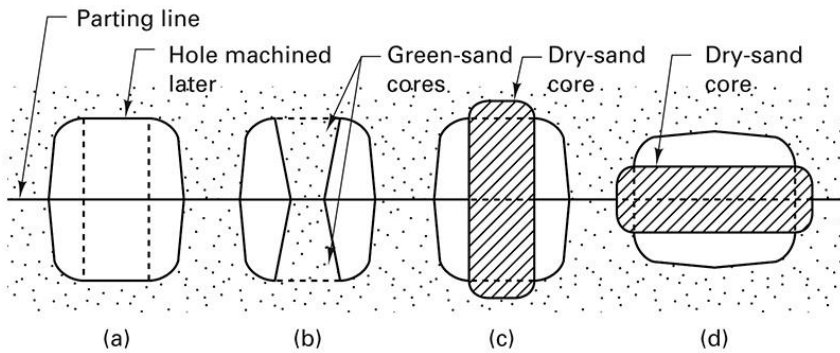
(Left) Four methods of making a hole in a cast pulley. Three involve the use of a core.
